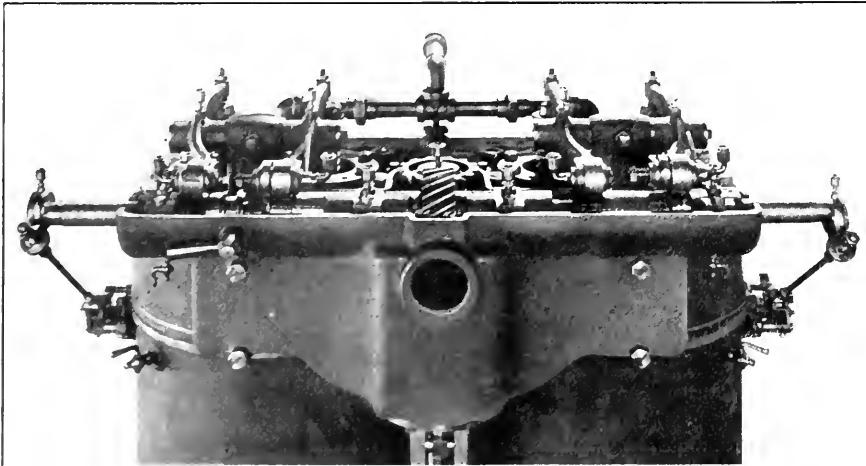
LAZIER CAM SHAFT AND VALVE GEAR
